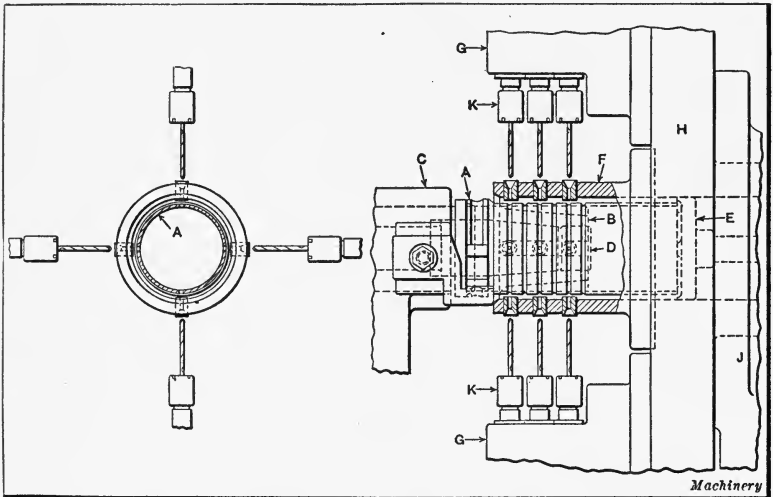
Close View of Work-holding Fixture and Drilling Spindles of Machine shown in Fig. 10
